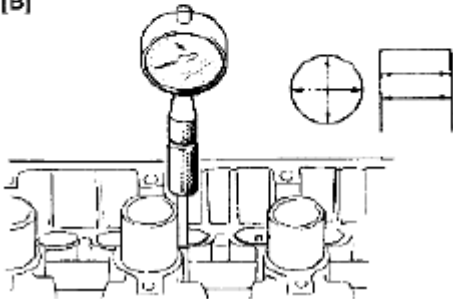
Identifying Tappet Outside Diameter & Cylinder Head Bore
